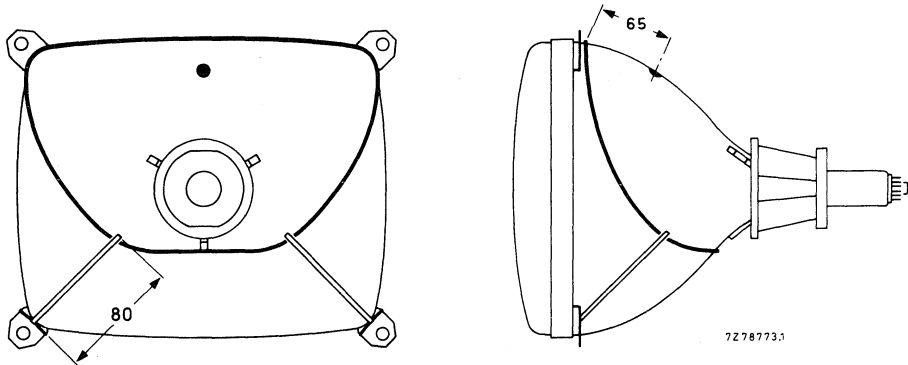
Position of degaussing coil on the picture tube; dimensions are given in mm.
